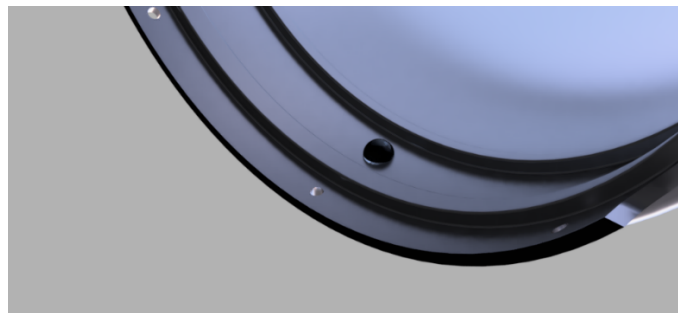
CAD render of the glass bead over the hole in the casing assembly, before it is melted in the vacuum furnace
